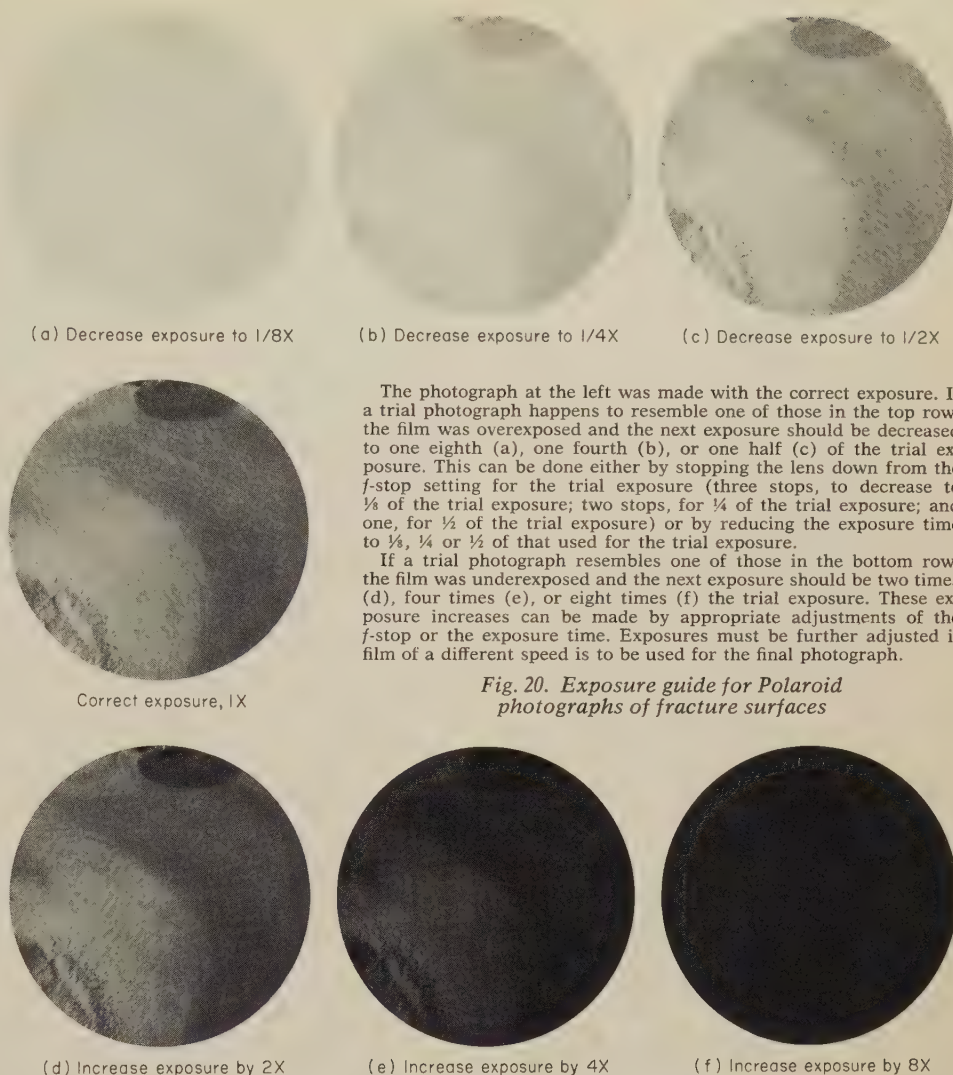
Exposure guide for Polaroid photographs of fracture surfaces
